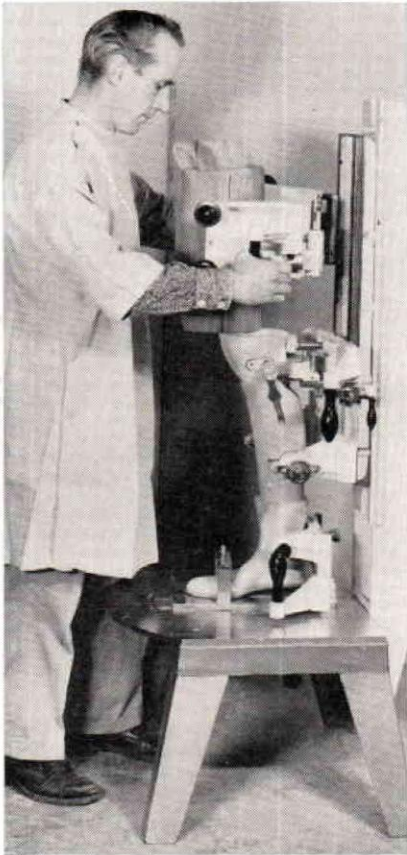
Prosthetist Removing Socket Bracket from Transfer Jig.
